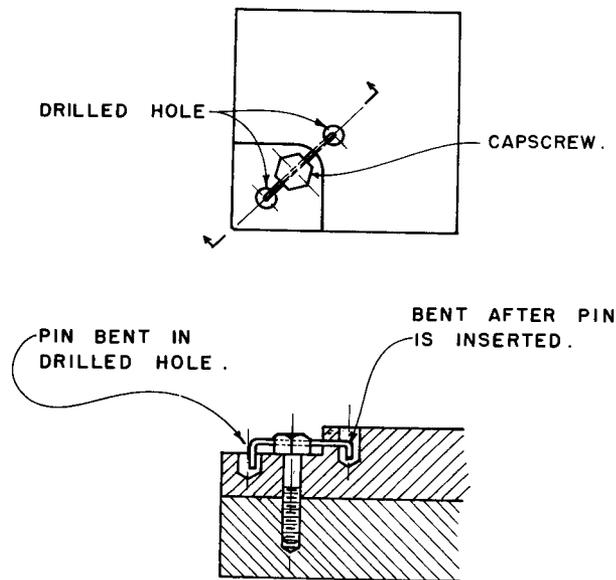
Class-A Bent Pin for Protruding Head Cap Screw.
